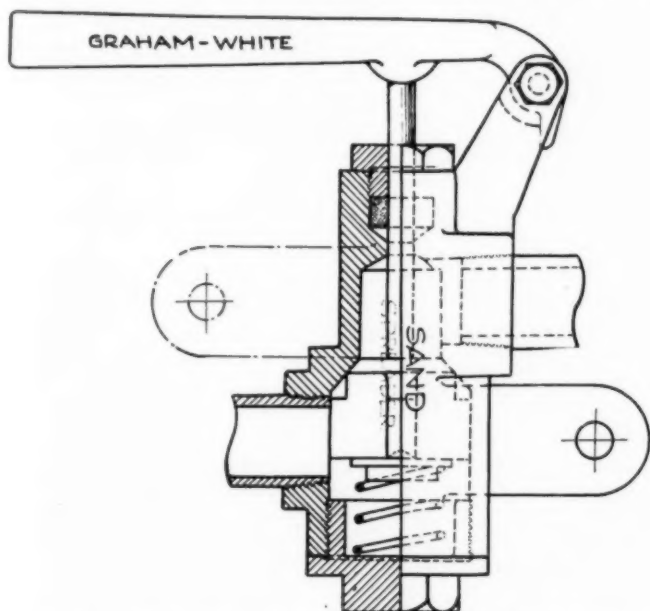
Operating Valve of the Sand Spreader, Located in the Locomotive Cab
